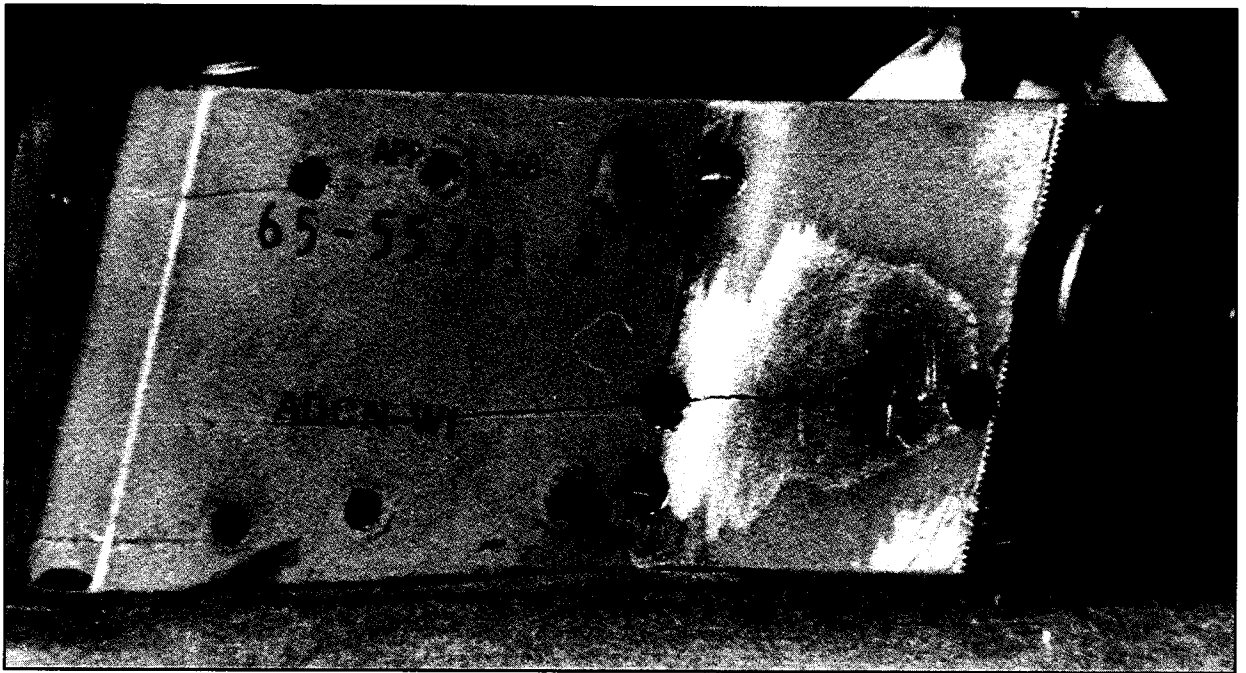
STRESS-CORROSION CRACKING OF 7079-T6 FITTING
